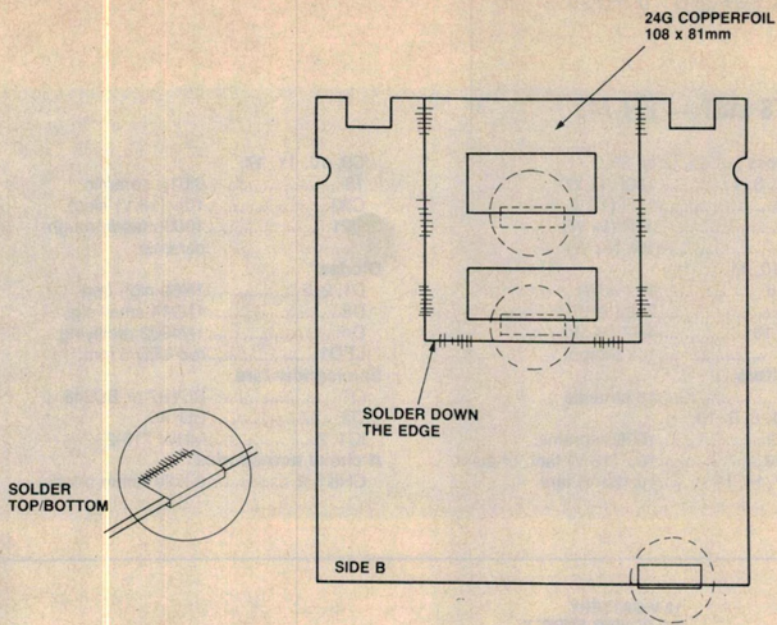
Copper foil soldering positions. Three pieces of foil should be soldered into position. The larger square piece of foil is soldered on to cover two of the small pieces.
